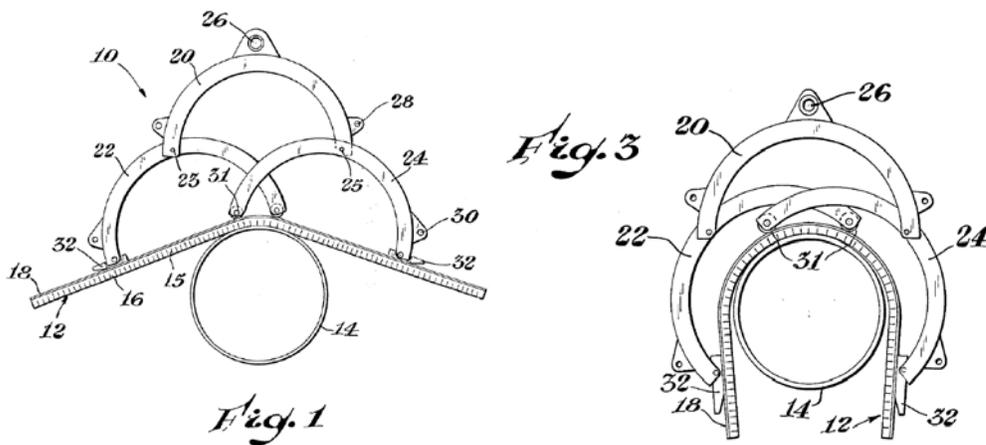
, reproduced above, is a front elevational view of a yoke assembly of a sheet wrapper 10 prior to closing a sheet 12 about a pipe section 14 and Figure 3, reproduced above, is a front elevational view of a yoke assembly in an intermediate closing position. Schlosser, col. 1, ll. 50–57. The sheet wrapper 10 includes a plurality of in-line yoke assemblies including center yoke arms 20, yoke-shaped end rocker arms 22 and 24 and slider shoe mechanisms 32. *Id.* at col. 2, ll. 24–61. Schlosser discloses the sheet wrapper, either by its own weight, or through a driving mechanism, will cause the rocker arms 22 and 24 to cam the sheet about the pipe circumference. Schlosser, col. 2, l. 64 – col. 3, l. 5. As can be seen in Figures 1 and 3, the rocker arms 22 and 24 apply force on the ends of the sheet through contact with slider shoe mechanism 32. In this regard, we
